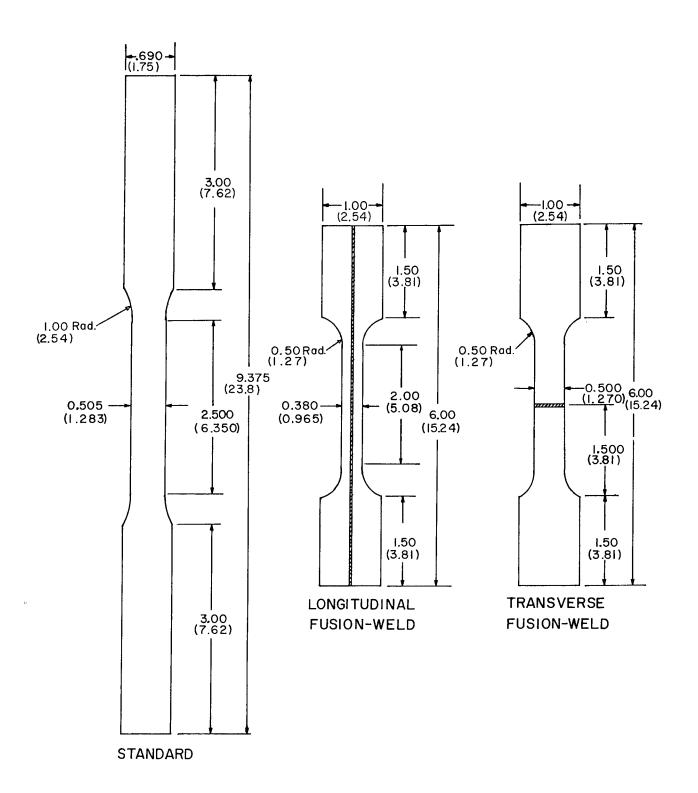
Tensile specimens. All dimensions are in inches (centimeters).
